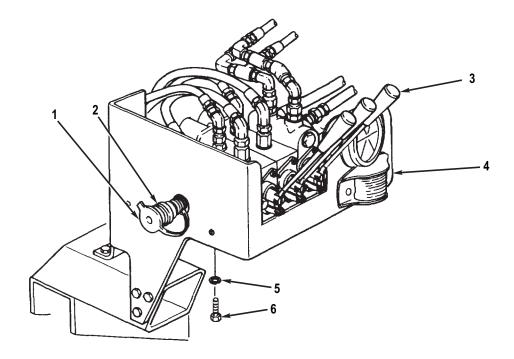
Hydraulic Control Valve (Front Dolly) Removal.
